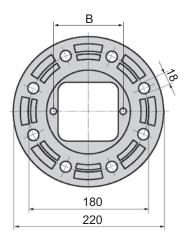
Mounting flange B PVC-U = 105 PP = 103.5
